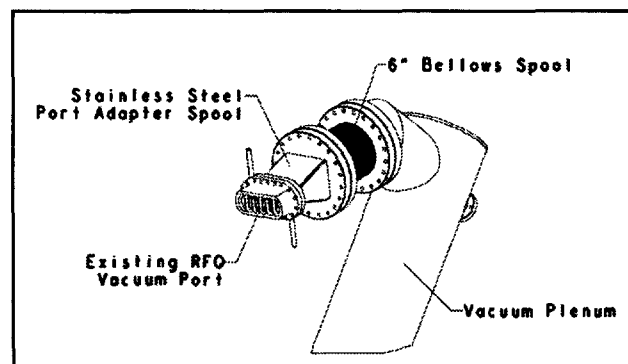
RFQ Vacuum Port Adapter Spool & Bellows Assembly
